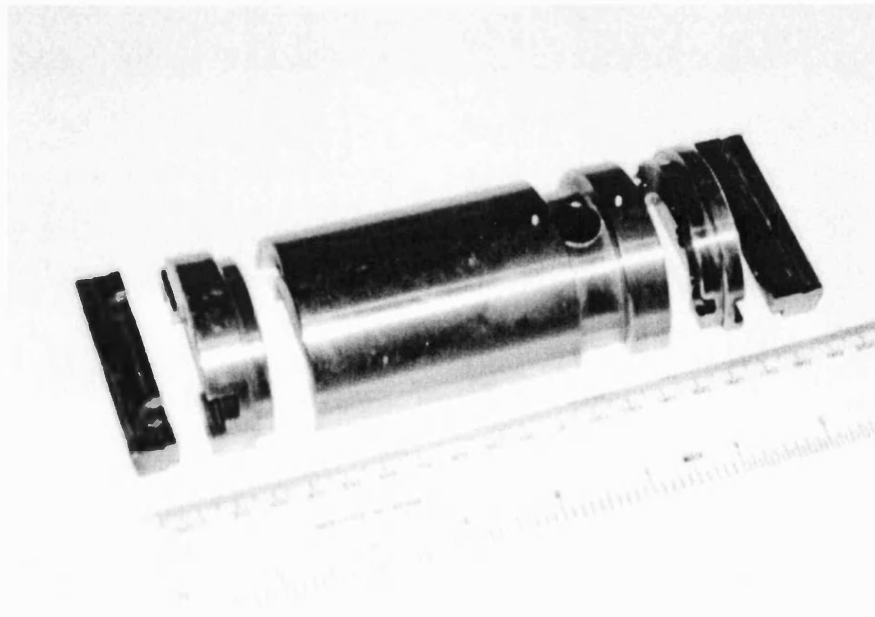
Photograph of initial force transfer system. Half the actuator housing is shown here
